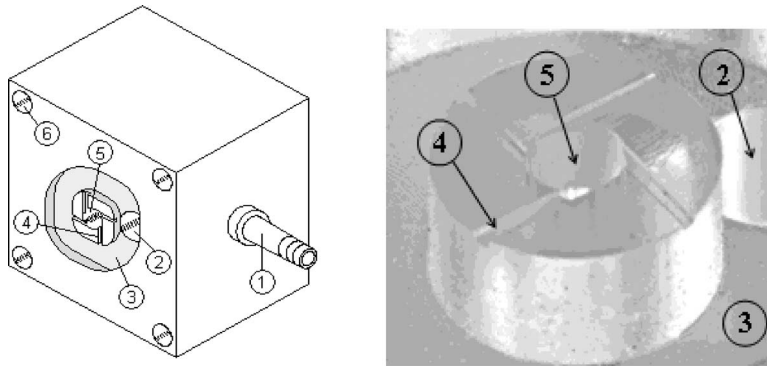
Nozzle section of the vortex tube. (Left) Front view of the inlet nozzle section. (Right) Perspective view showing the details of the inlet nozzles.
